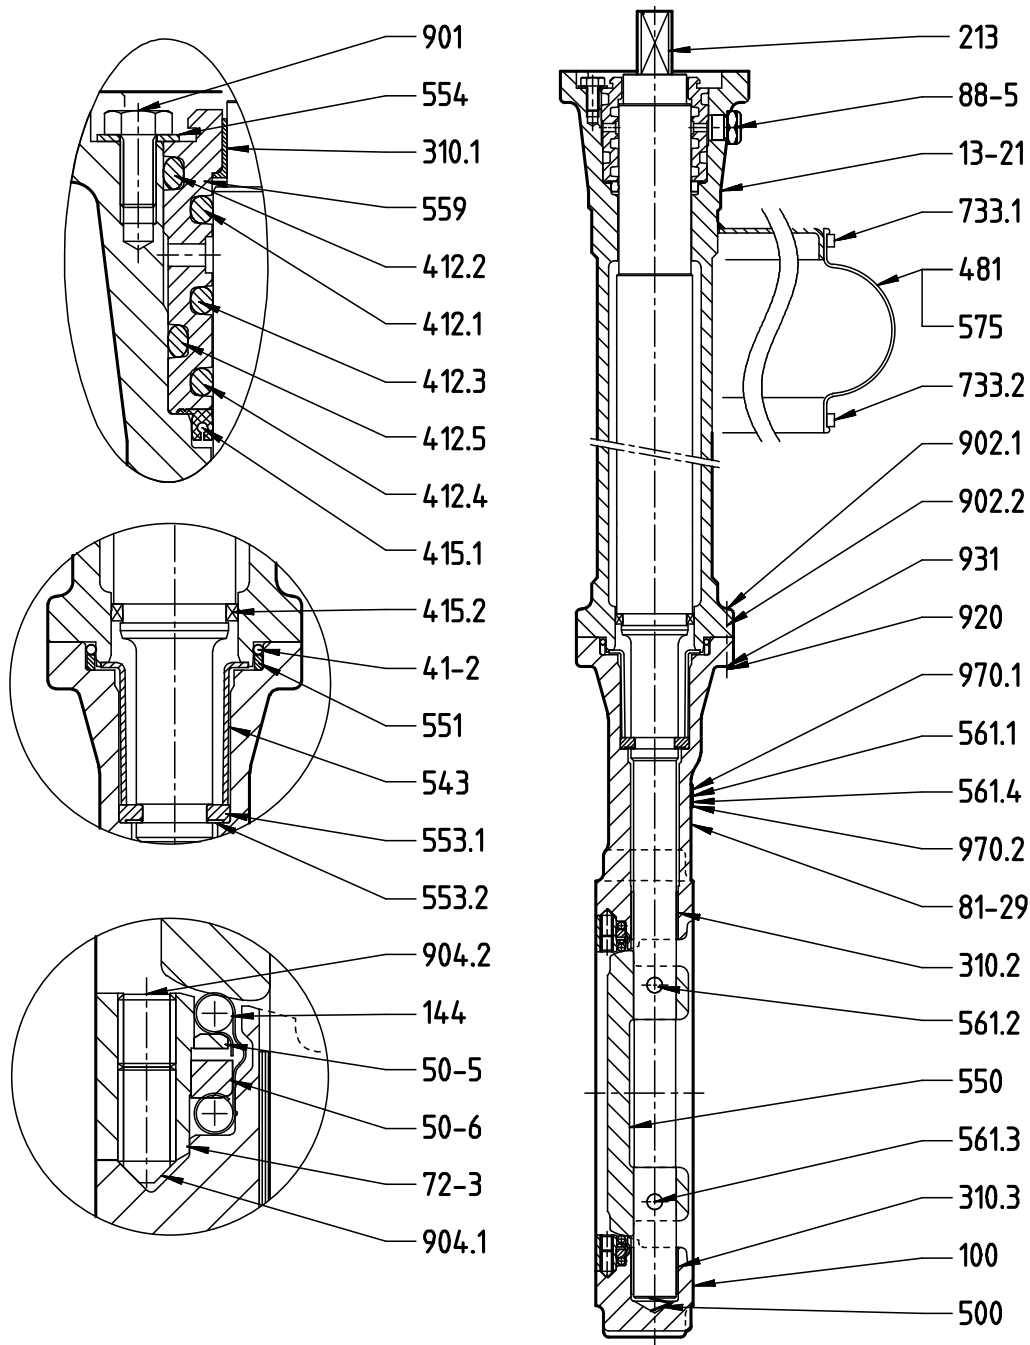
Sectional drawing of DANAIS CRYO AIR with metal seat DN 50-250 (2 - 10 inches)
